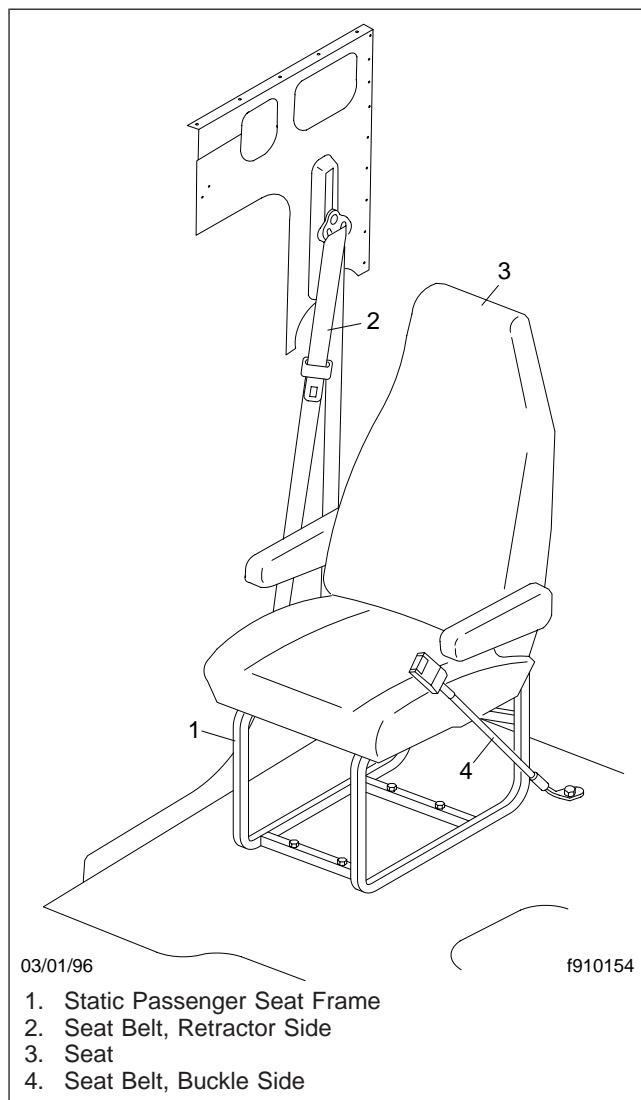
, Seat Belt Assembly (static passenger seat shown)
